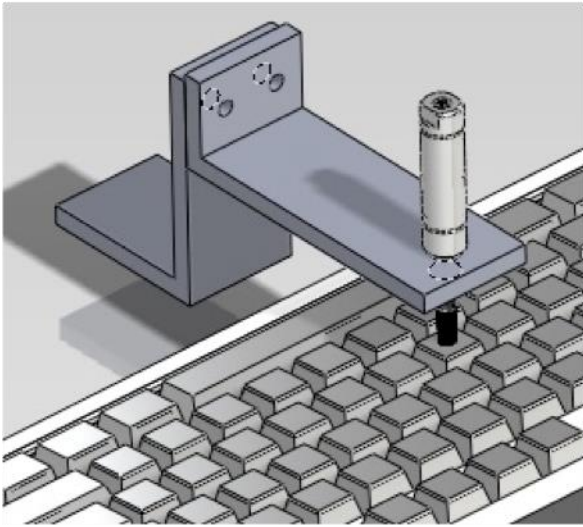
Test Stand: A CAD Model of the Pneumatic Test Stand being used on a Key.
